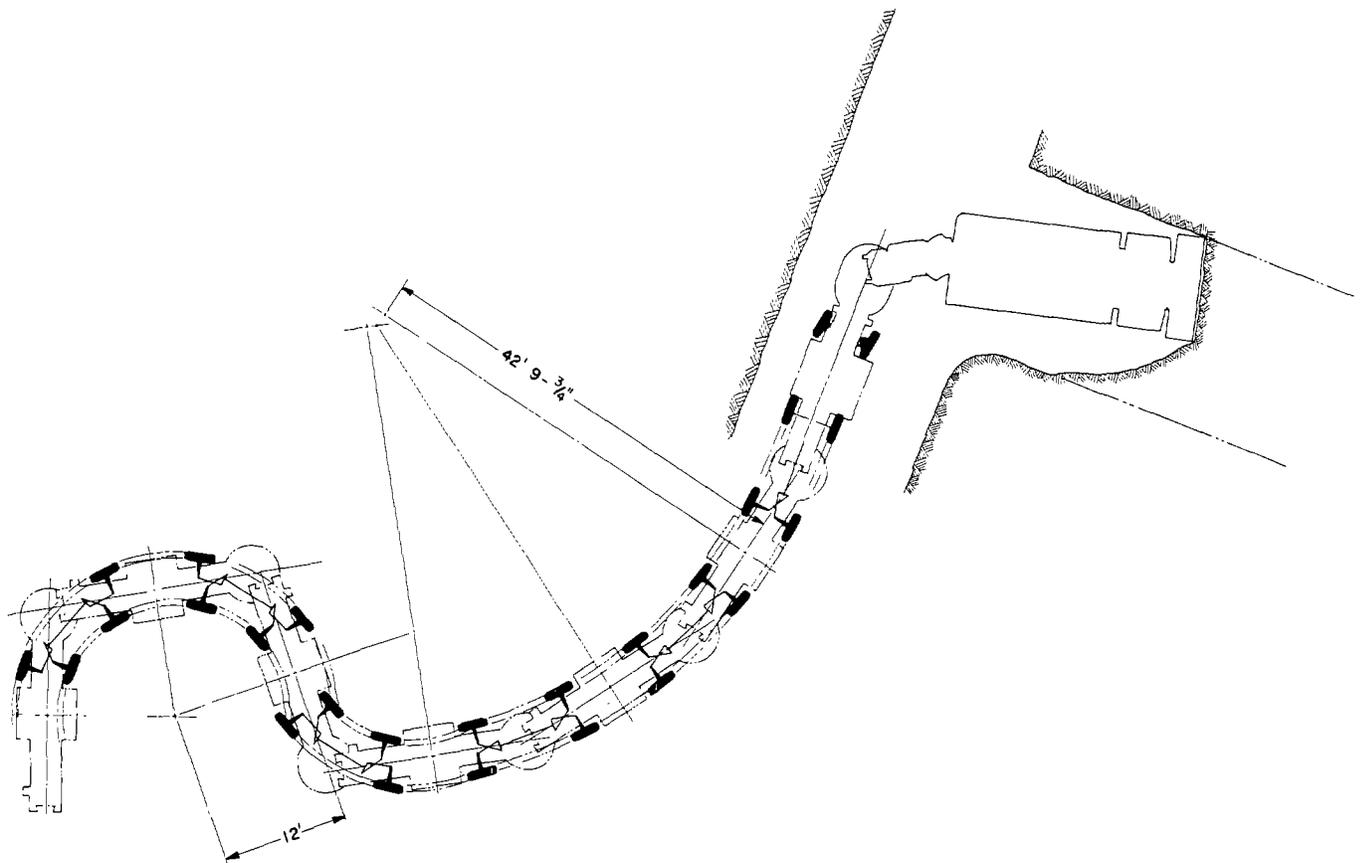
Tracking layout, 12- and 43-ft turning radii.
